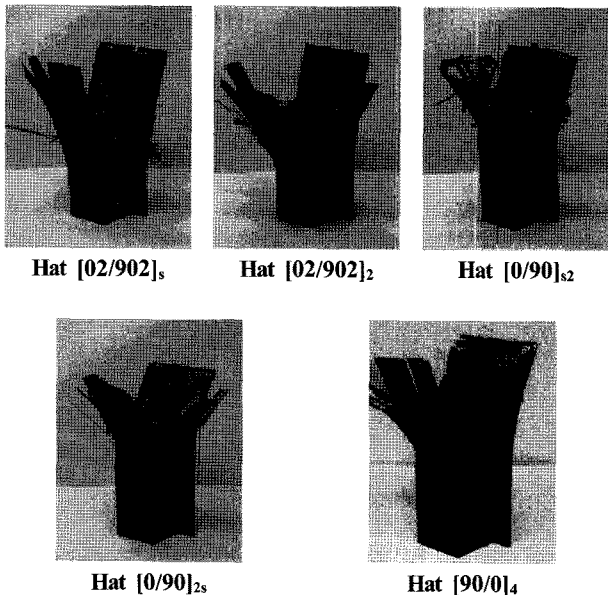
Collapse modes CFRP hat-shaped section members after impact test(outer angle 0°)
